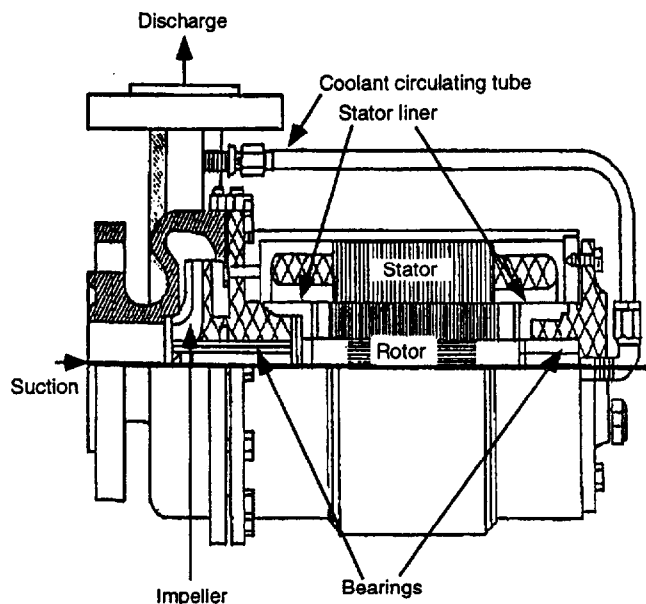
Diagram of seal-less canned-motor pump (U.S. EPA, 1990, p. 2-11).
